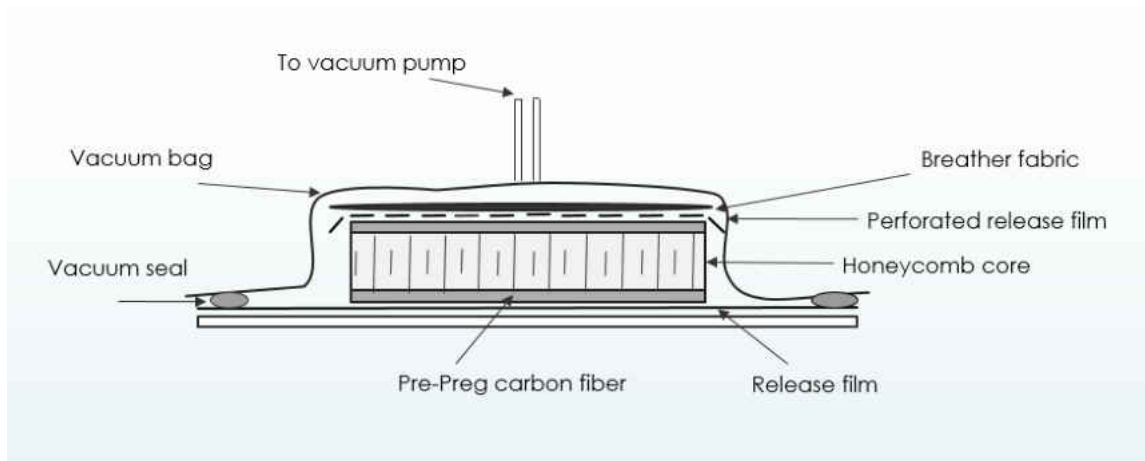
2 Vacuum bagging for making of Sandwich Structures
